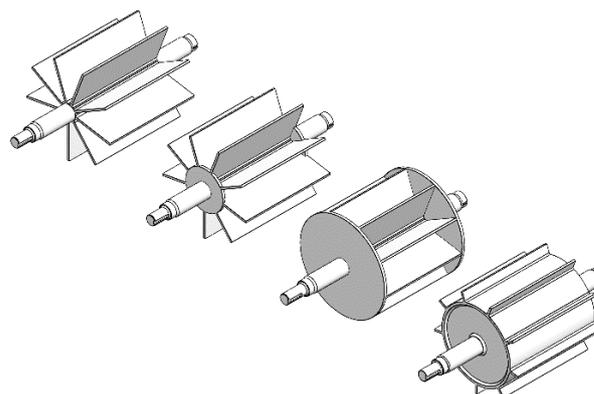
Different End Designs (left to right): open ended, semi end disc, end disc and closed end disc
